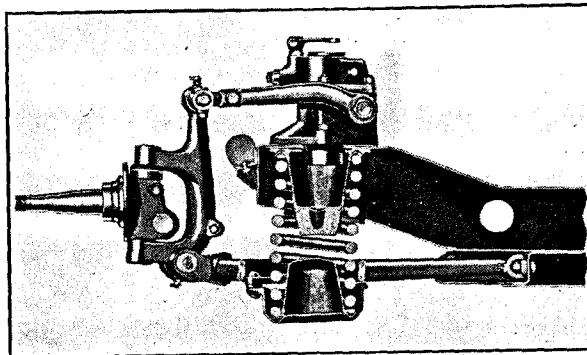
Sectional view of Cadillac left front wheel suspension system viewed from the rear. Typical of LaSalle.
